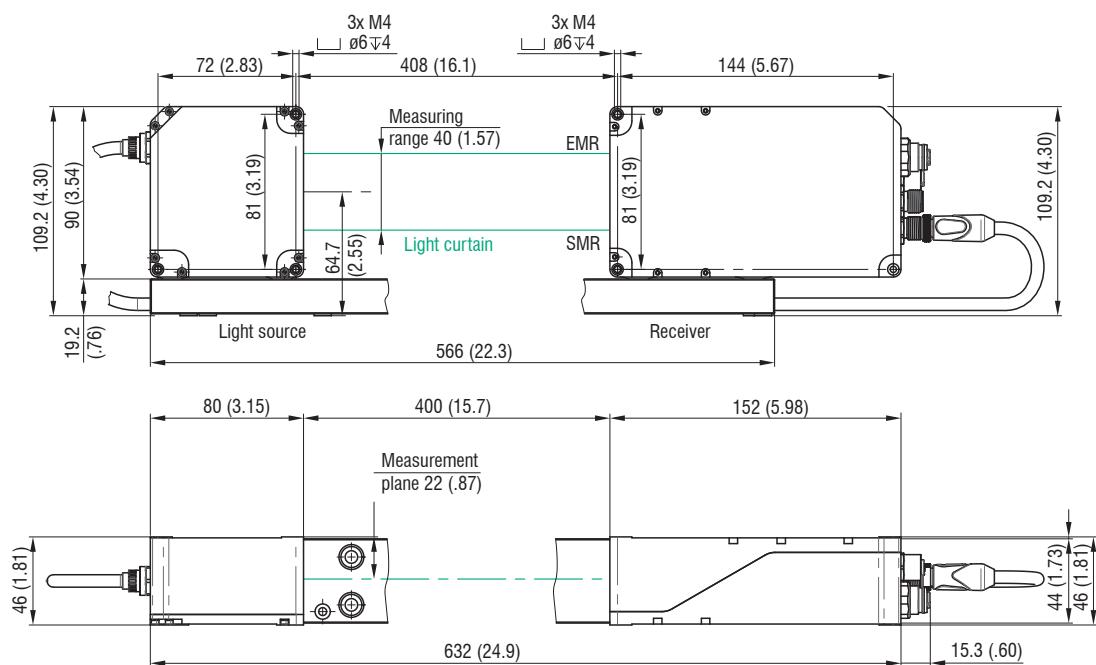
Dimensional drawing light source and receiver ODC2700-40(002), dimensions in mm
